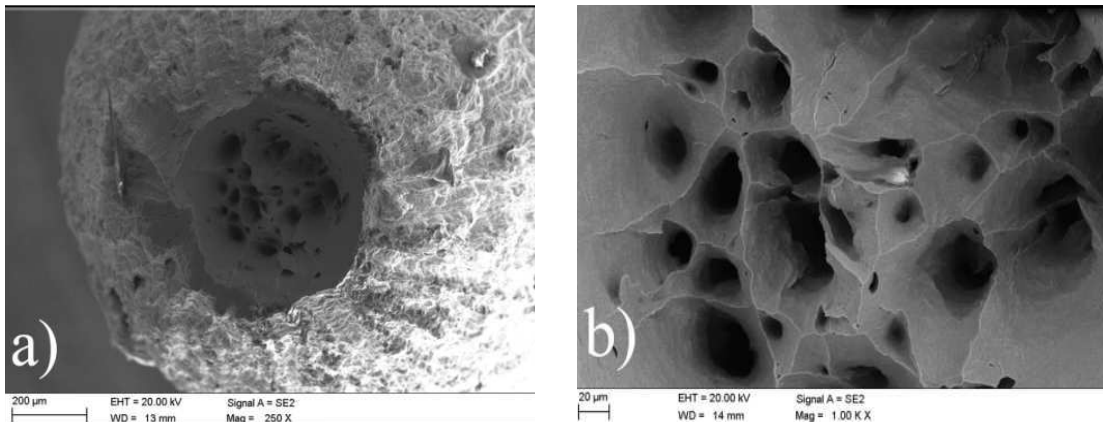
Fracture of the Zn sample after strength test, casting 108, a) break in the areas of large elongation, b) mixed fracture with higher brittle fracture share
